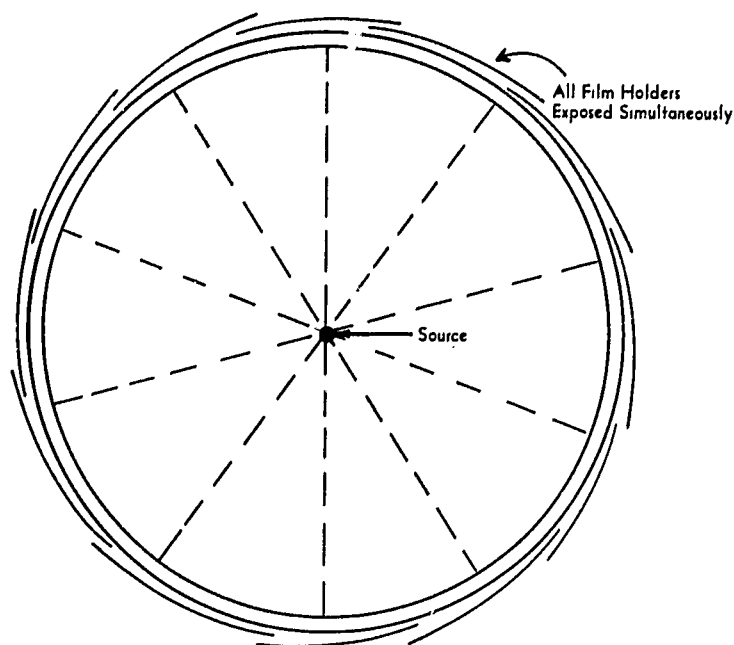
Radiographing Welds of Larger Diameter Pipes and Pressure Vessels.
